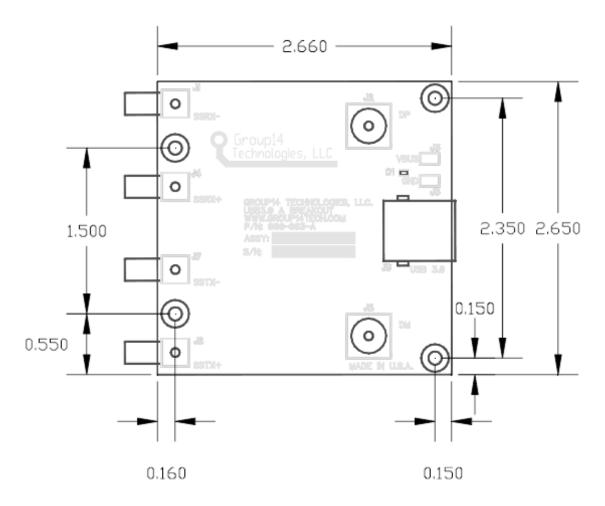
USB30A2SMA Breakout Physical Dimensions (Dimensions are in Inches)
